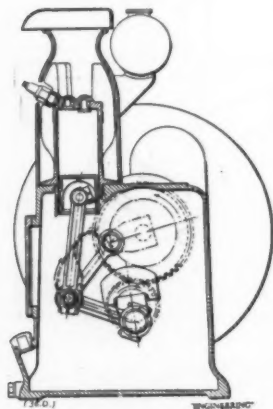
TWO-CRANKSHAFT DRIVE MECHANISM OF THE ANDREAU-CITROËN VARIABLE-STROKE ENGINE
